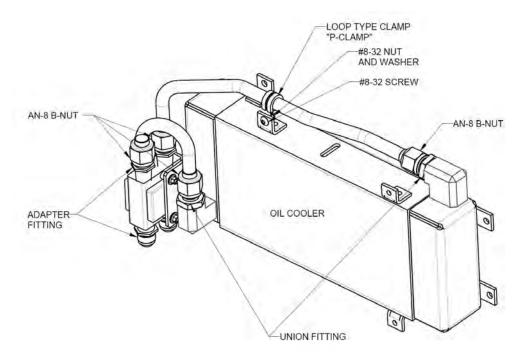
OIL COOLER AND THERMOSTAT ASSEMBLY
